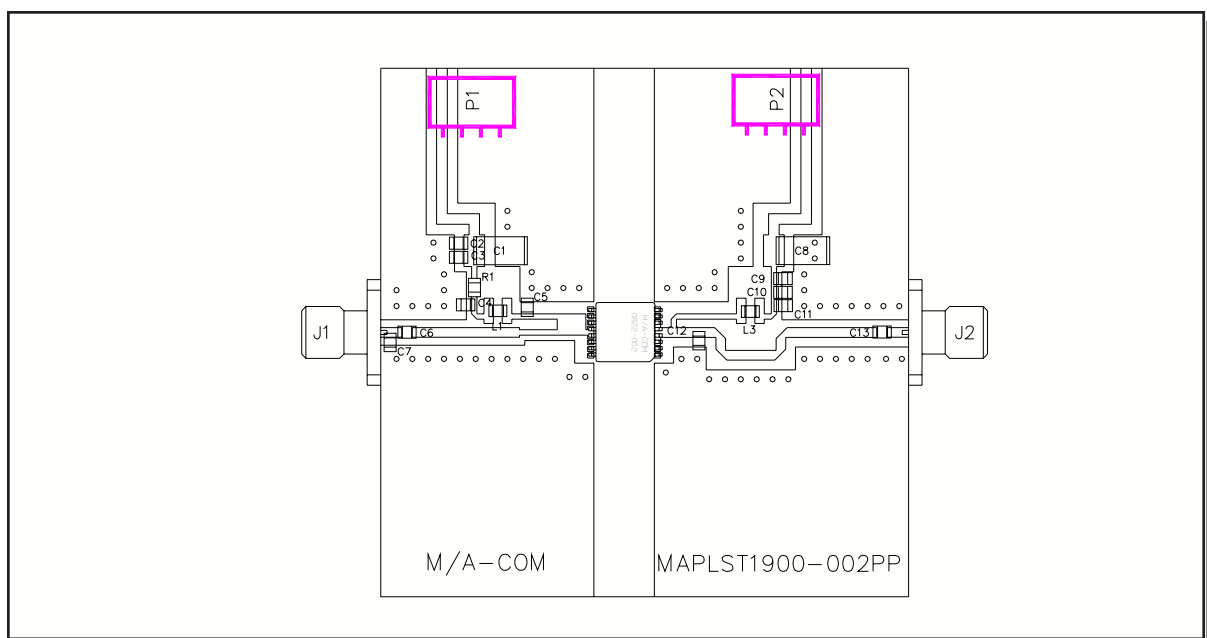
1880—1920 MHz Test Fixture Component Layout
